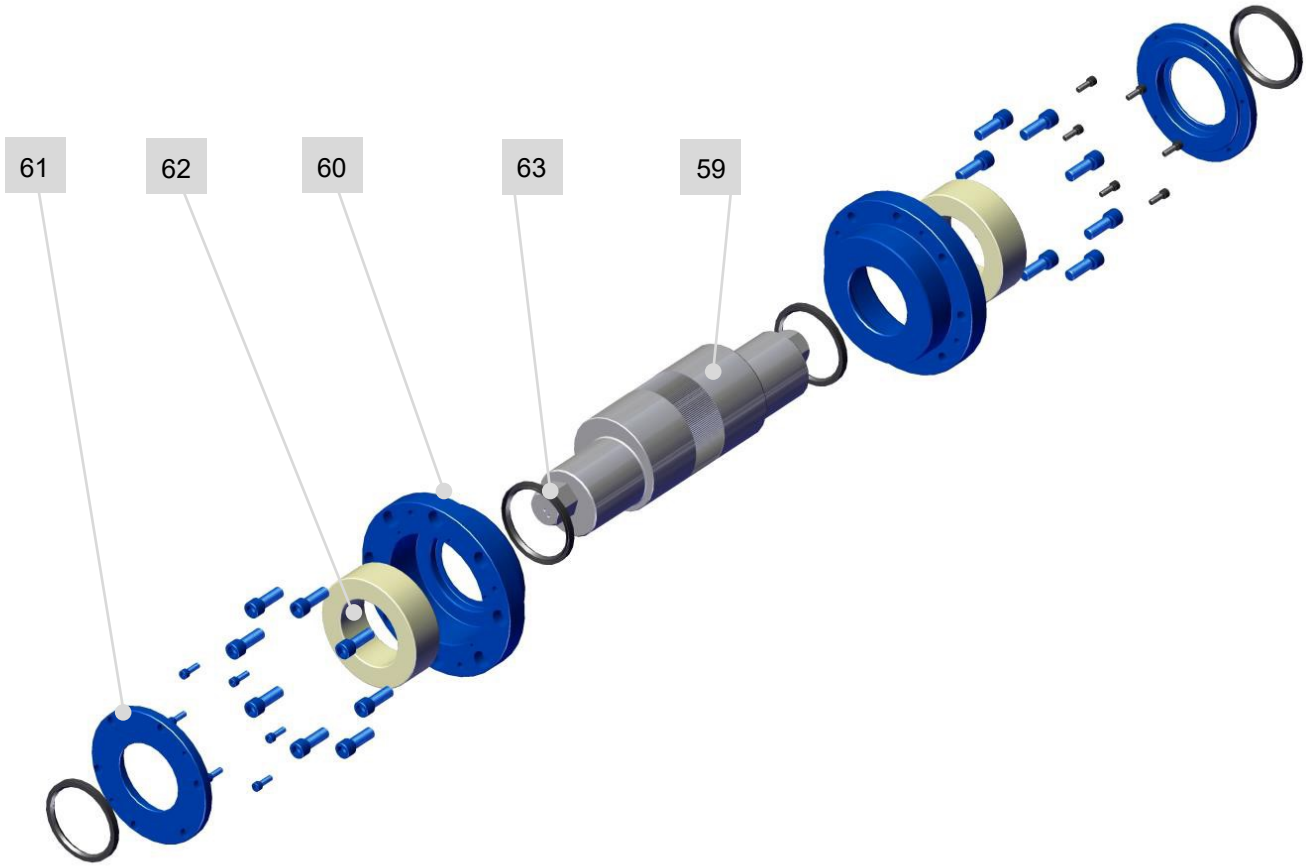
Parts of the LMFC 250 crank arm shaft assembly.
